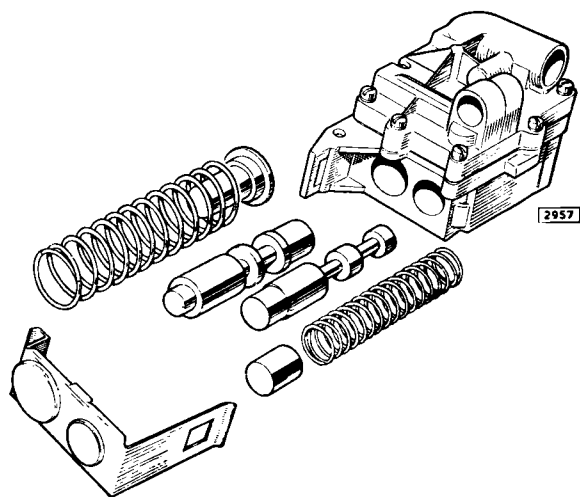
Regulator assembly. Valves, springs and retainer shown exploded
